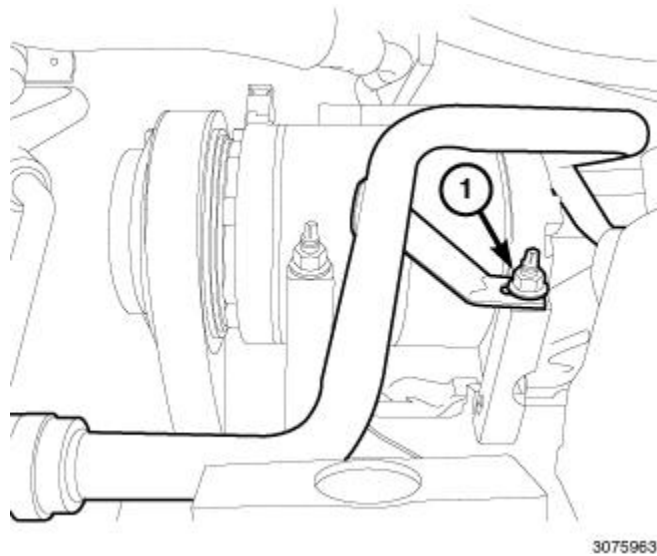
Heater Core Return Tube Lower Support Bracket Retaining Nut
